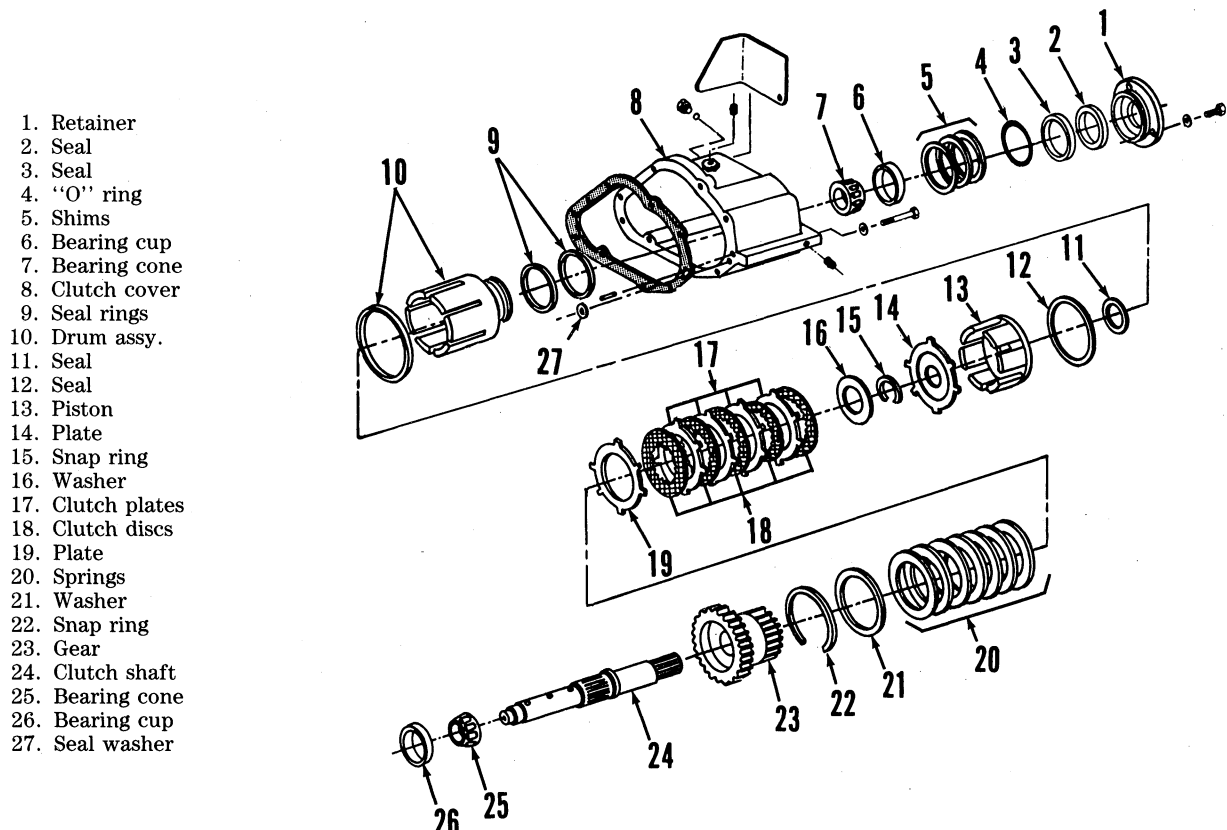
Exploded view of mechanical front-wheel drive clutch assembly used on tractors equipped with Power Shift transmission.
